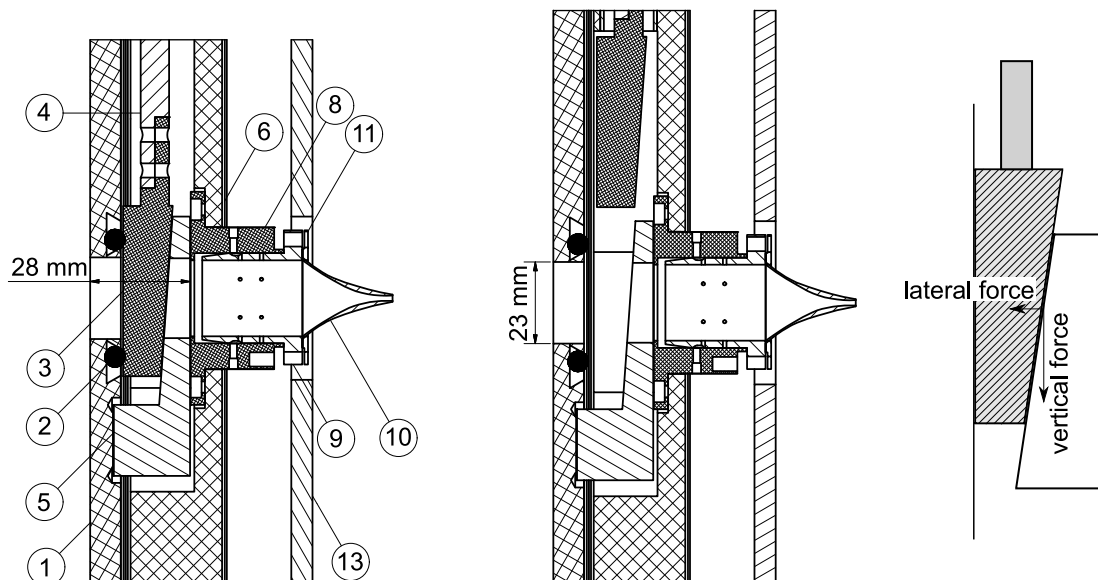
Sectional view of the gate valve. In the left panel the valve is shown with the linear feedthrough (4) in the closed position. The sealing flange (3) is pressed against the O-ring (2) by the wedge clamp (5). The thickness of the valve is 28 mm. In the middle panel the valve is shown with the linear feedthrough in the open position. The open aperture is 23 mm. In the right panel the mechanism of the lateral force when pressing the two wedges against each other is illustrated schematically.
